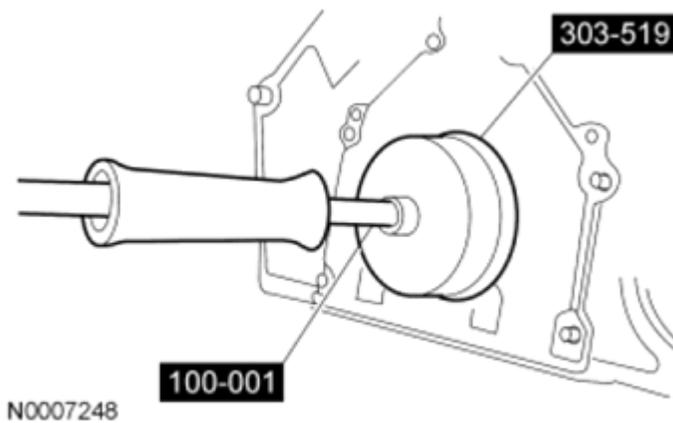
Removing Crankshaft Rear Seal Using Special Tools
